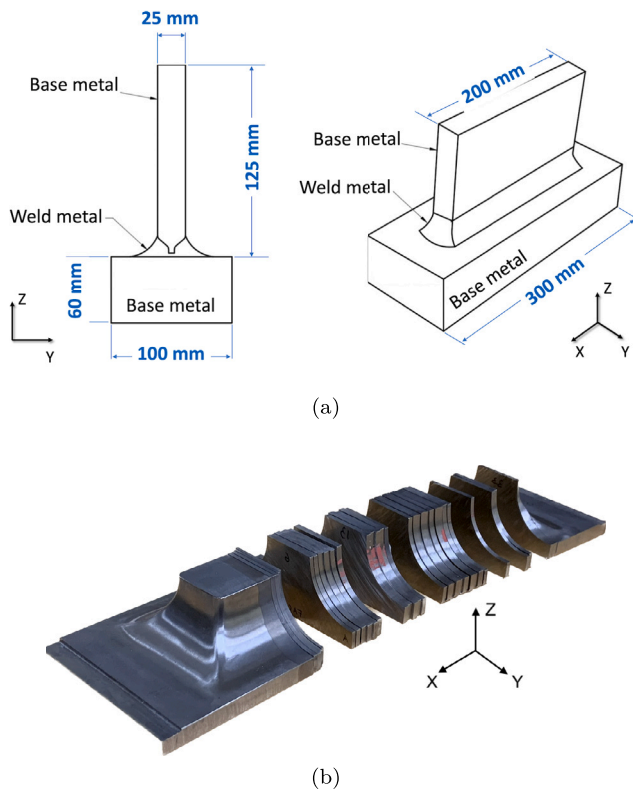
Image of the T-shape welded joint: (a) geometry and (b) cross-section slices.
